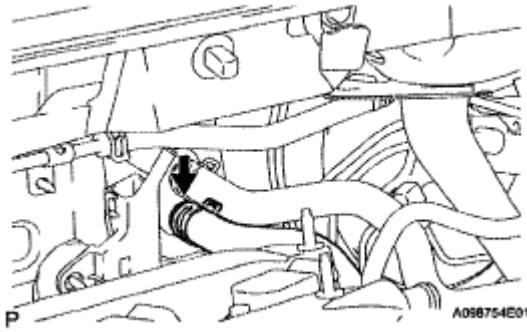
Locating Heater Water Outlet Hose From Air Conditioner Tube
